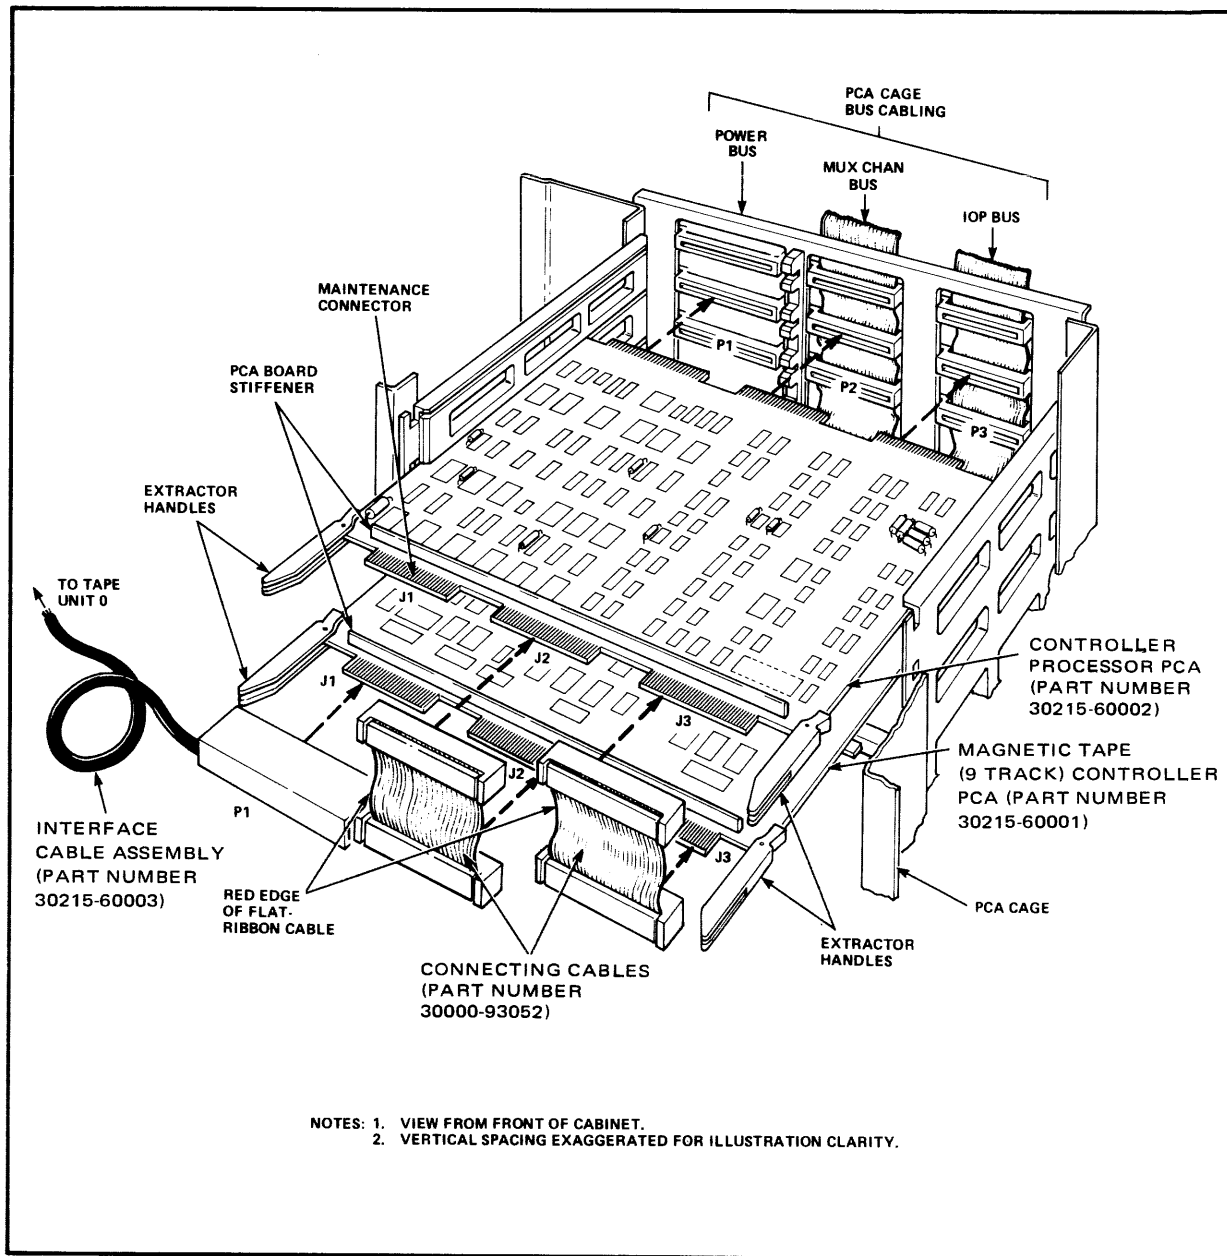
HP 30215A Magnetic Tape Unit Interface
